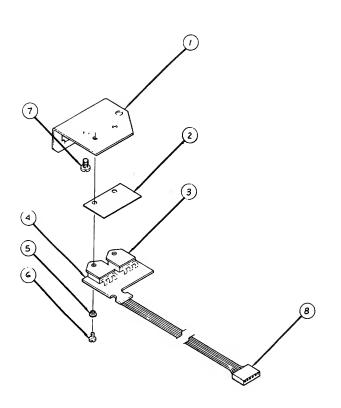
POWER TRANSISTOR ASSEMBLY
